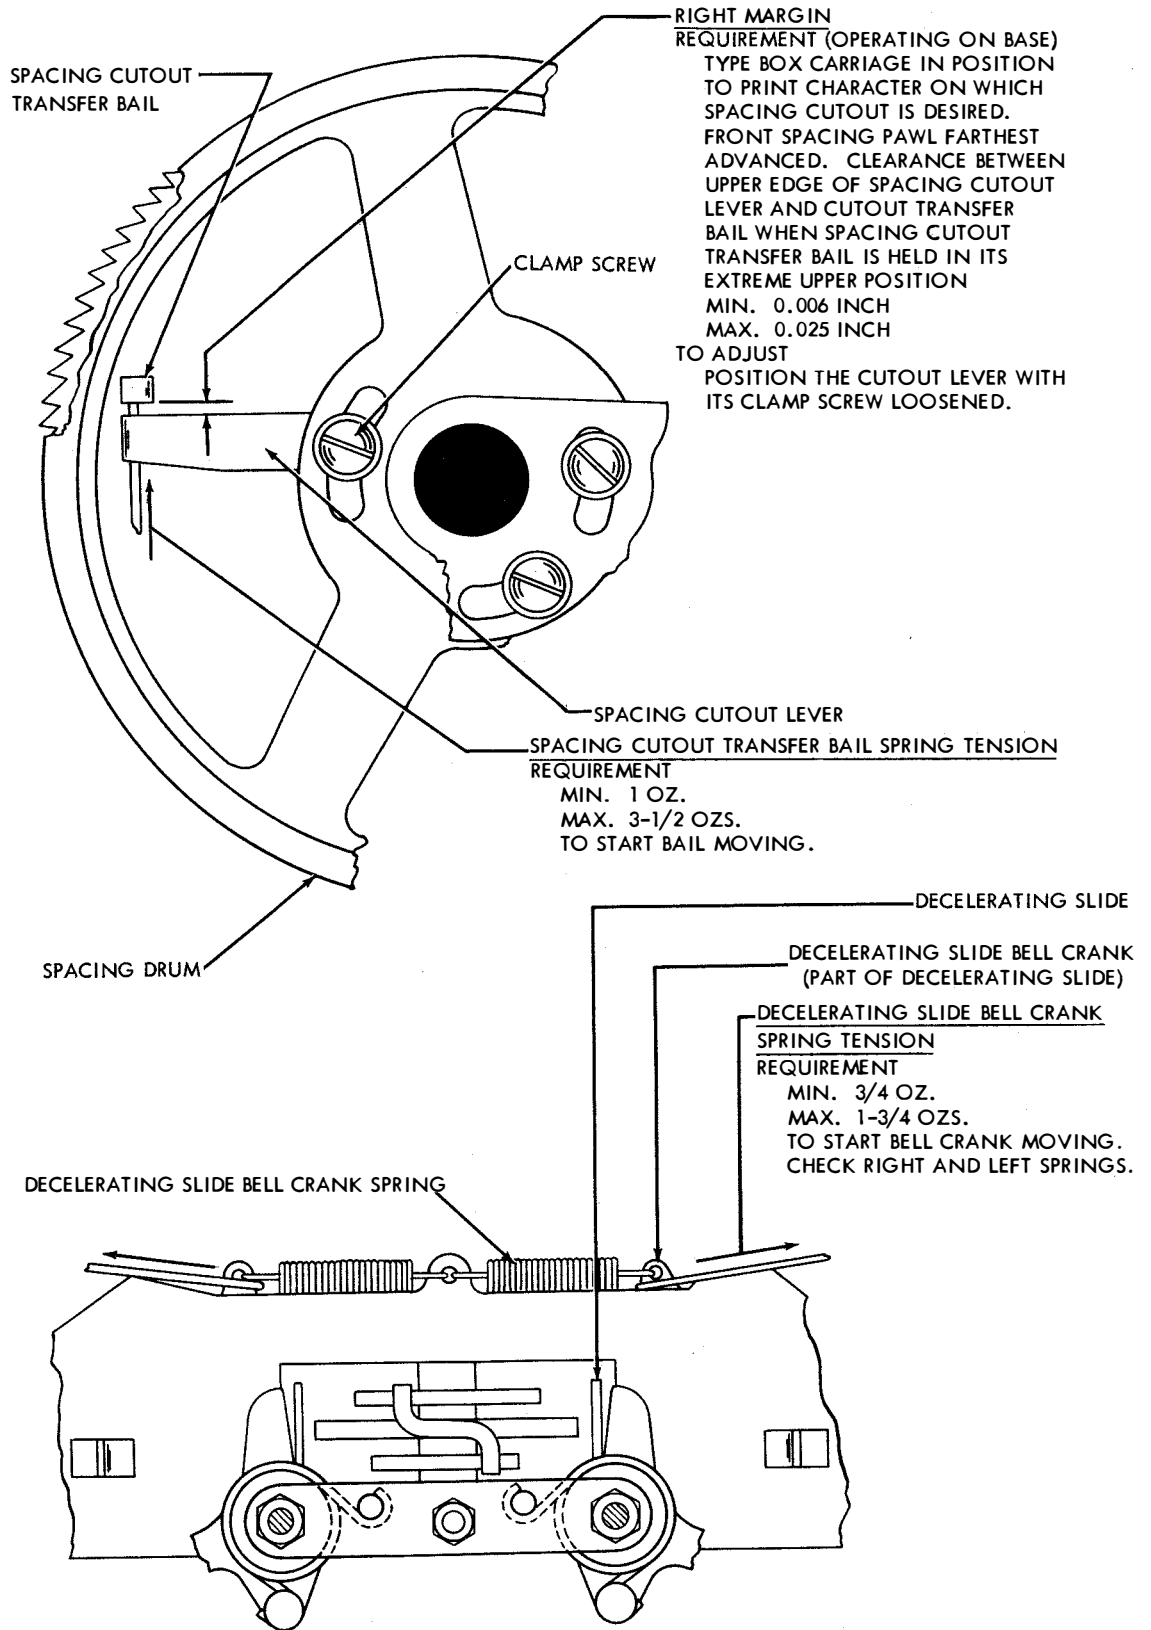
TYPING UNIT, RIGHT MARGIN AND DECELERATING SLIDE MECHANISM, FRONT VIEW
